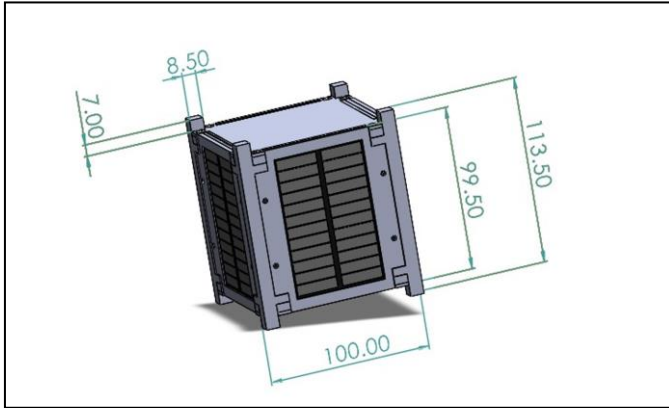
Designed model of the CubeSat structure in SolidWorks. Units in (mm)
